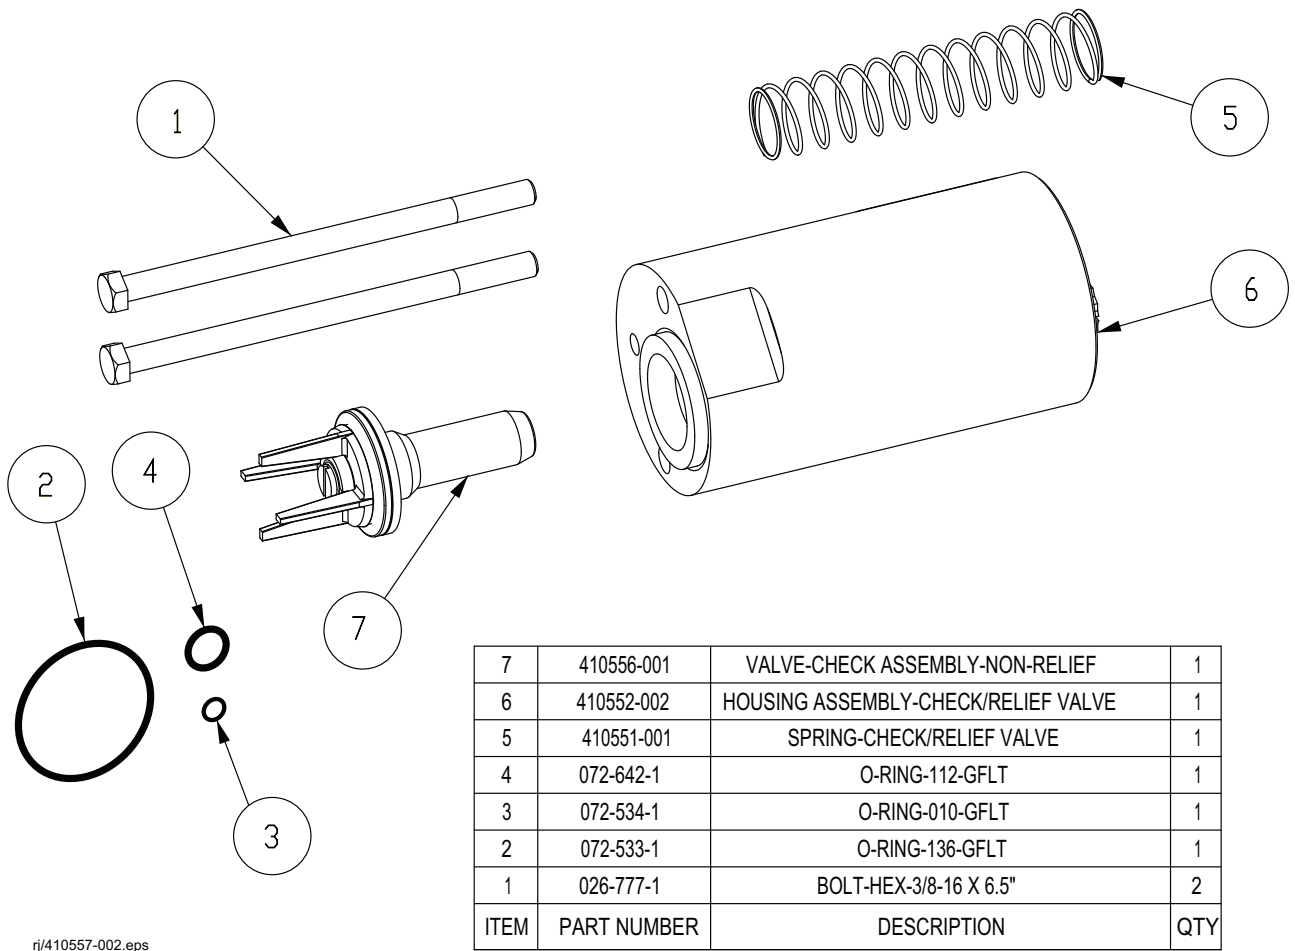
410557-002 Spikecheck Check Valve (Non-Pressure Relief Version), Housing, Spring, Fasteners, Seals
